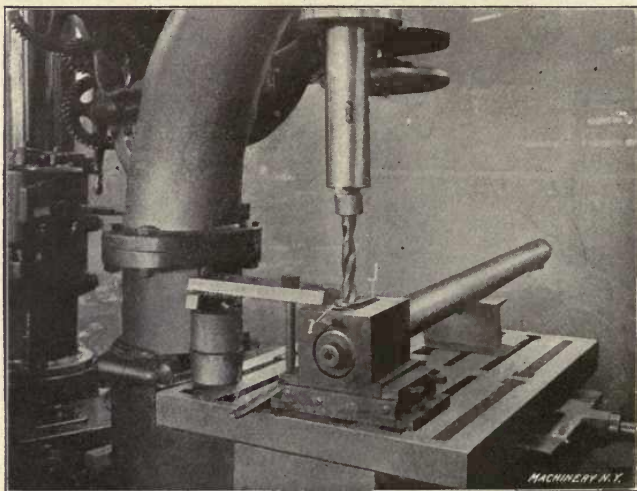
Jig for Drilling Keyslots in Piston-rods
